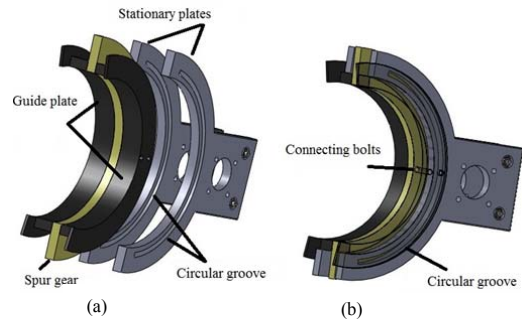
Forearm motion unit: (a) disassemble view, (b) assemble view
